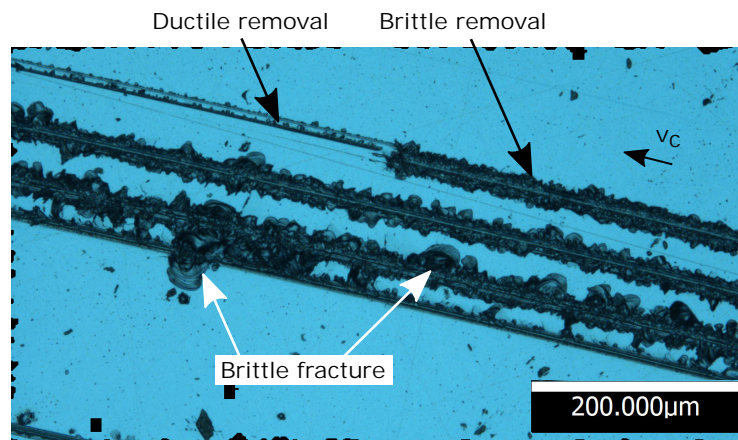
Several passes of the same grain over the workpiece. Brittle fractured zones and the transition from brittle to ductile removal are shown.
